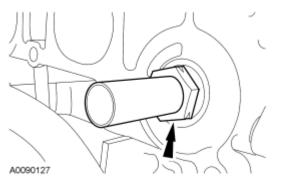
Locating Exhaust Gas Recirculation (EGR) Tube Courtesy of FORD MOTOR CO.
